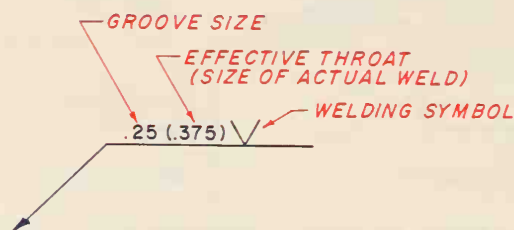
Size of weld is added to the left of the welding symbol in parentheses
